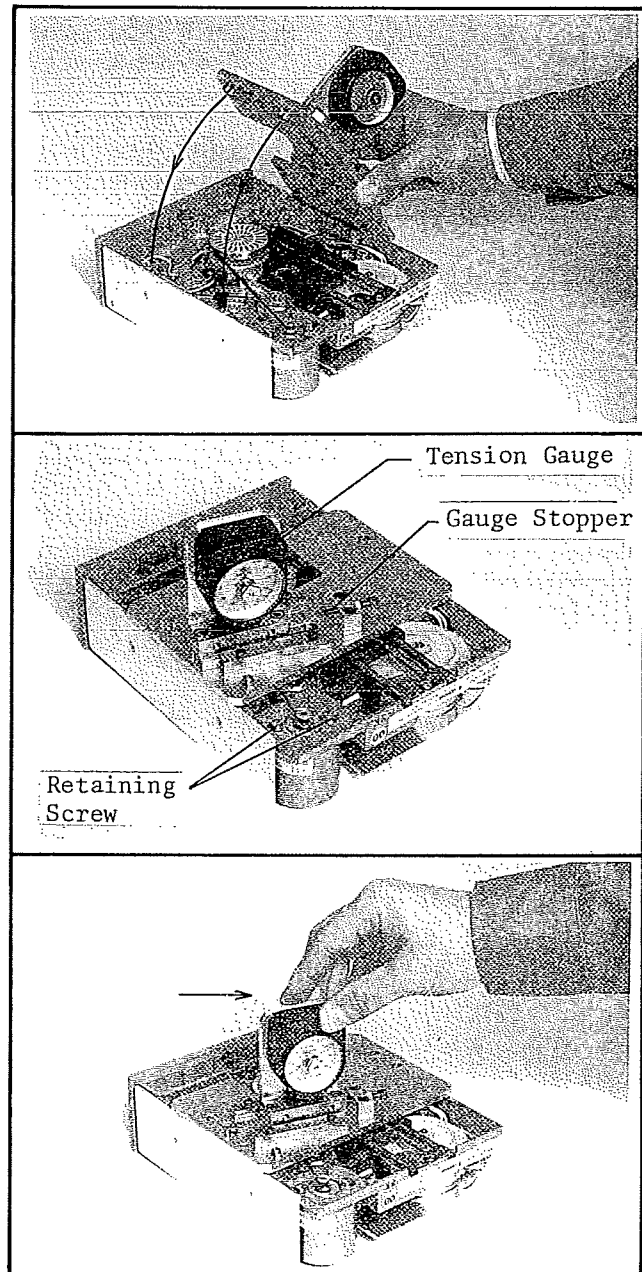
Drive Belt Tension Check and Adjustment Setup.
